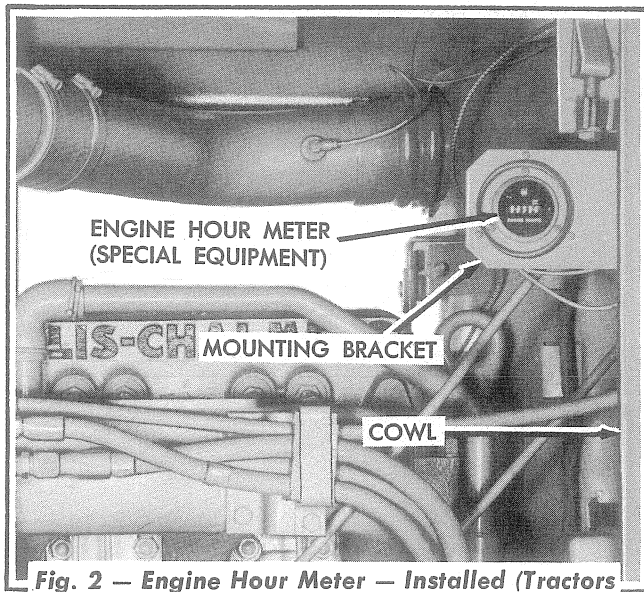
Engine Hour Meter — Installed (Tractors Serial No. 4001 and Above Shown — Tractors Prior to Serial No. 4001 Similar)
